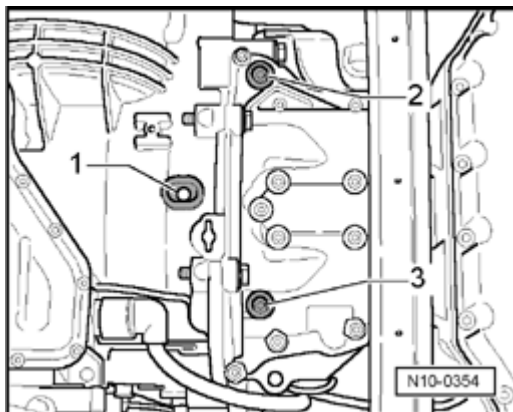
Guiding Front Transmission Mount Into Hole And Rear Engine Mounts Into Holes
